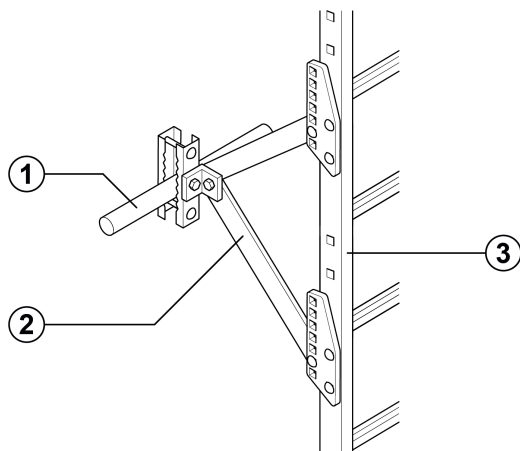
Twin Arm Plate and Adjustor Plate Mounting Assembly (P/N 506392 GALV.)
